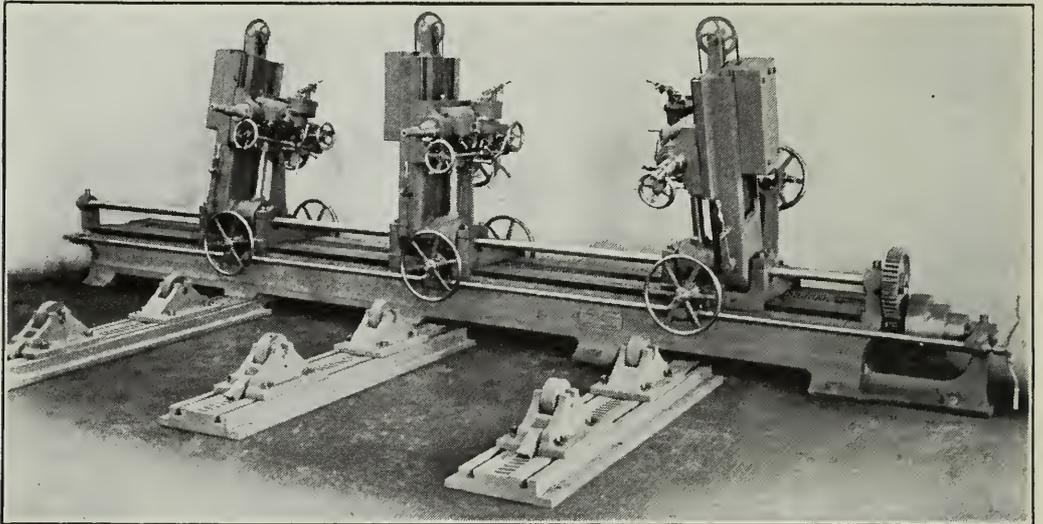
TRIPLE HORIZONTAL LOCOMOTIVE-BOILER BORING MACHINE.
